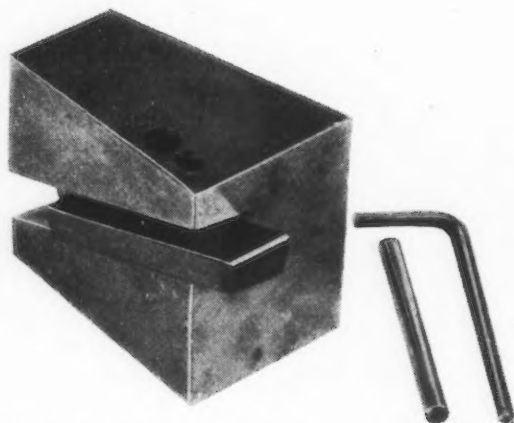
Special tool holding jig for accurately grinding the cutting angles on carbide blades.
